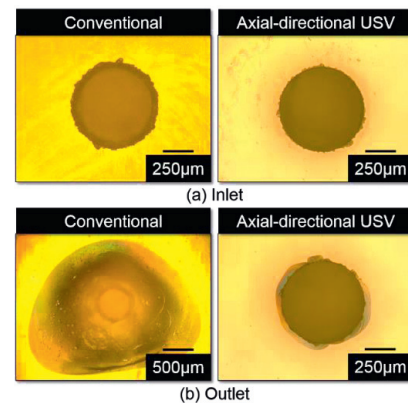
Digital microscope image of 20th inlet and outlet of machined holes with optimum cutting conditions.
